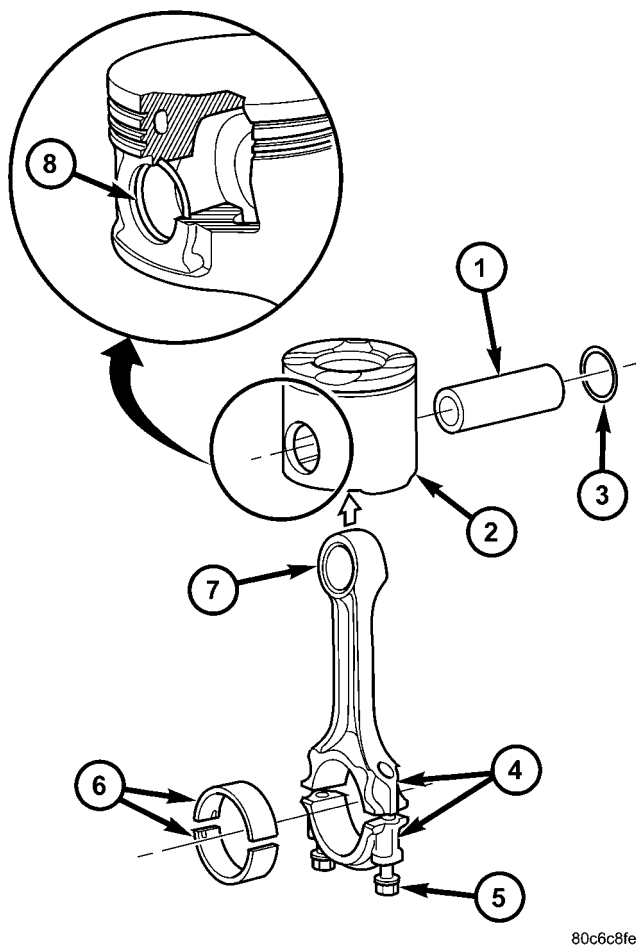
PISTON AND CONNECTING ROD ASSEMBLY
